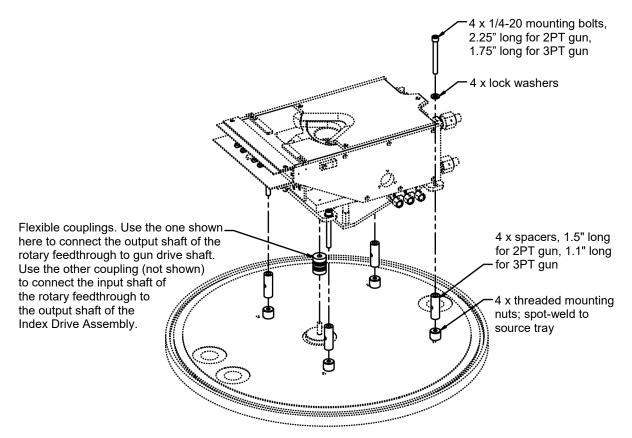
Parts Included in PT Gun Mechanical Installation Kits
